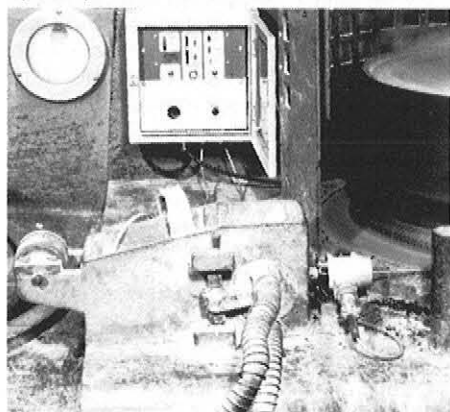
The lubrication failure detector consists of an exciter and transducer mounted to the die holder and a detector unit near the drawing machine
